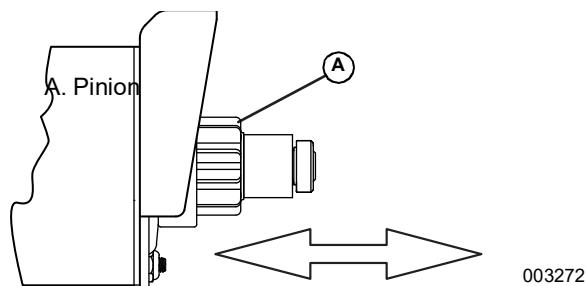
Check Pinion Gear Operation (410cc Single Cylinder Engine Units Only)
